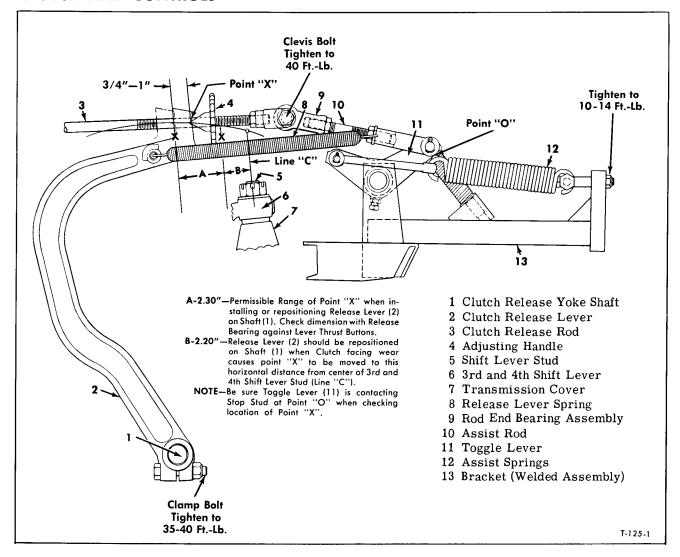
Release Shaft Lever Position and Release Bearing Clearance Adjustment
